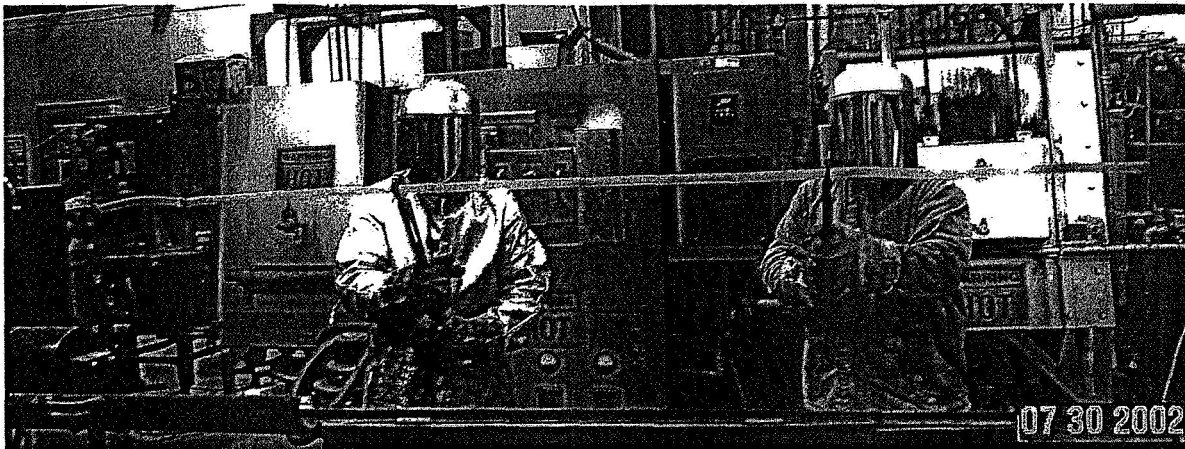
Right after extrusion, two technicians are holding the third 02K5-B1 extrusion. The billet was annealed at 1380°C and given 30 sec dwell and 8 sec inserting elapse. The yellowish glaring color indicates that the rod temperature may be still higher than 1200°C.
